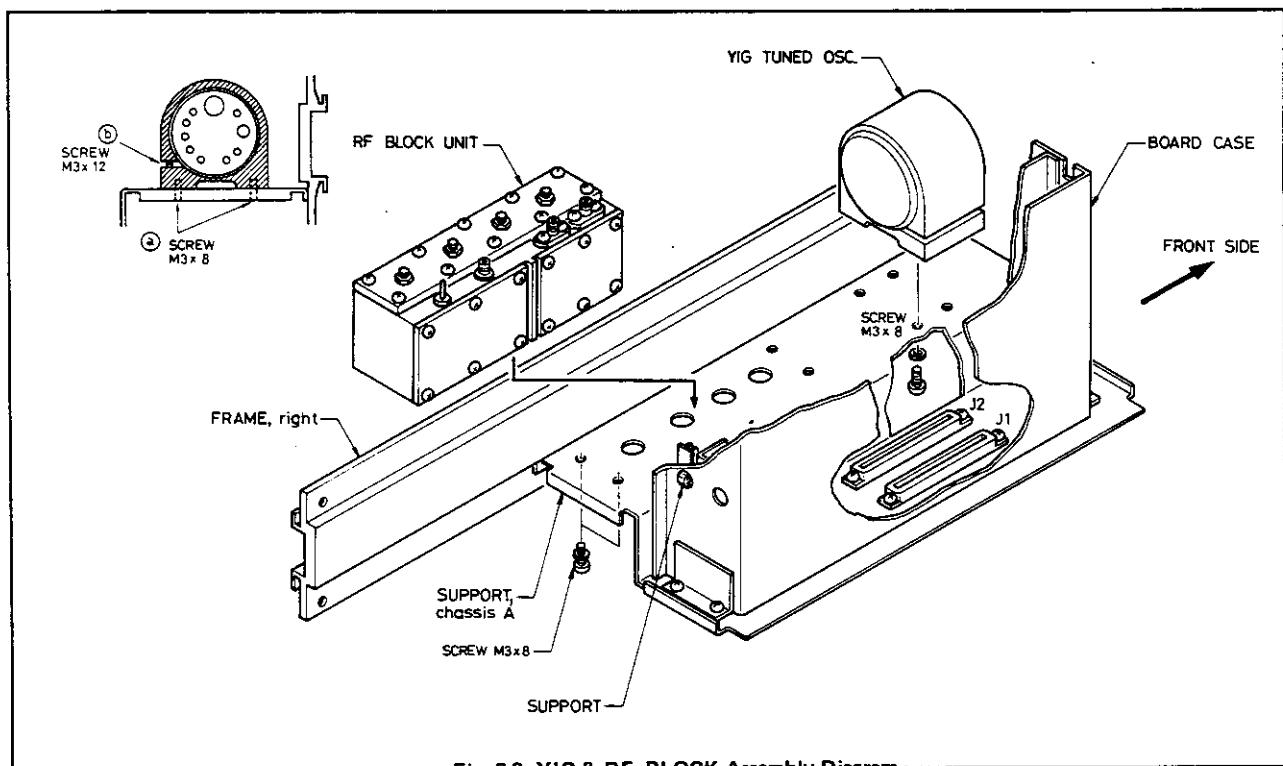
YIG & RF. BLOCK Assembly Diagram
